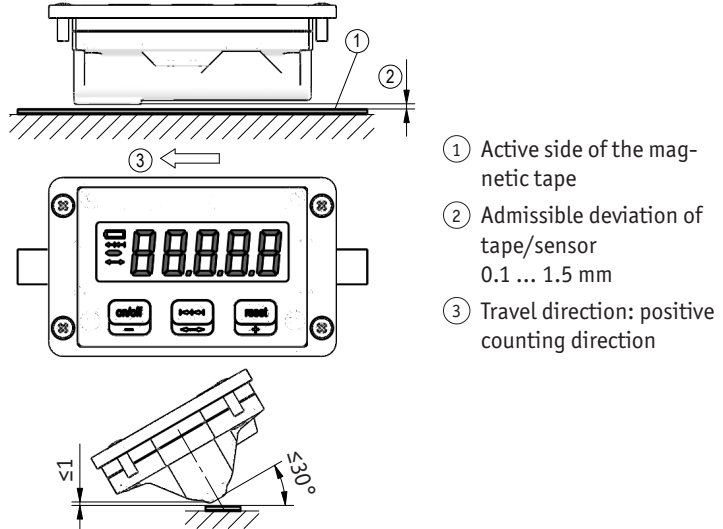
Definition of the counting direction with magnetic tape and with integrated sensor / magnetic tape, gap measure, tolerances
